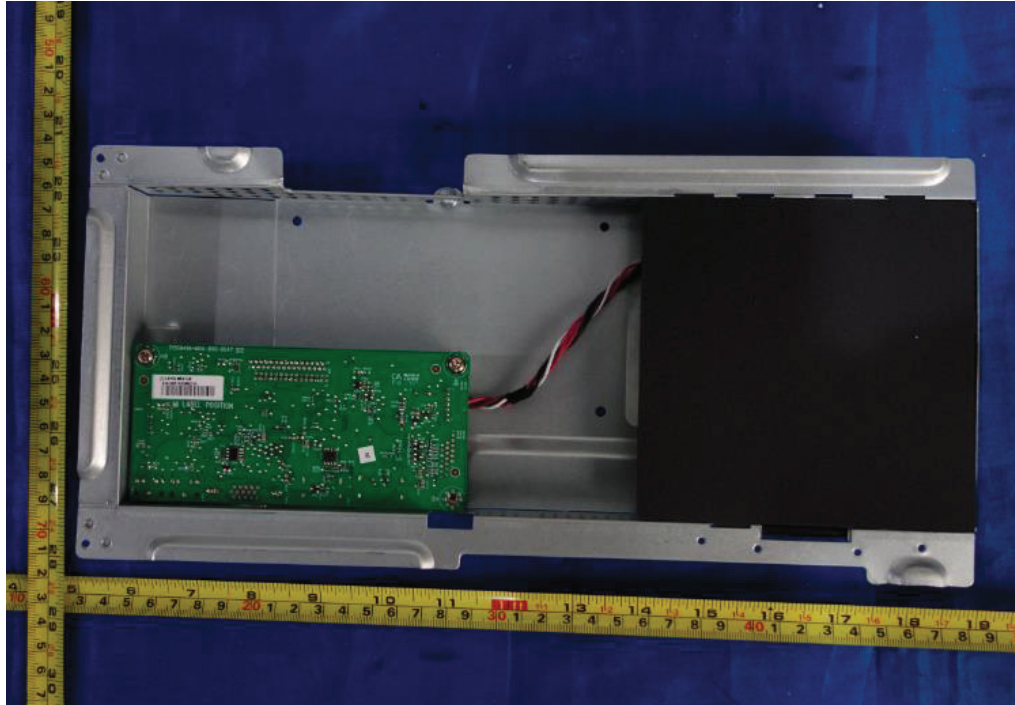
Metal enclosure type A with power board 715G7300 and main board 715G9496
